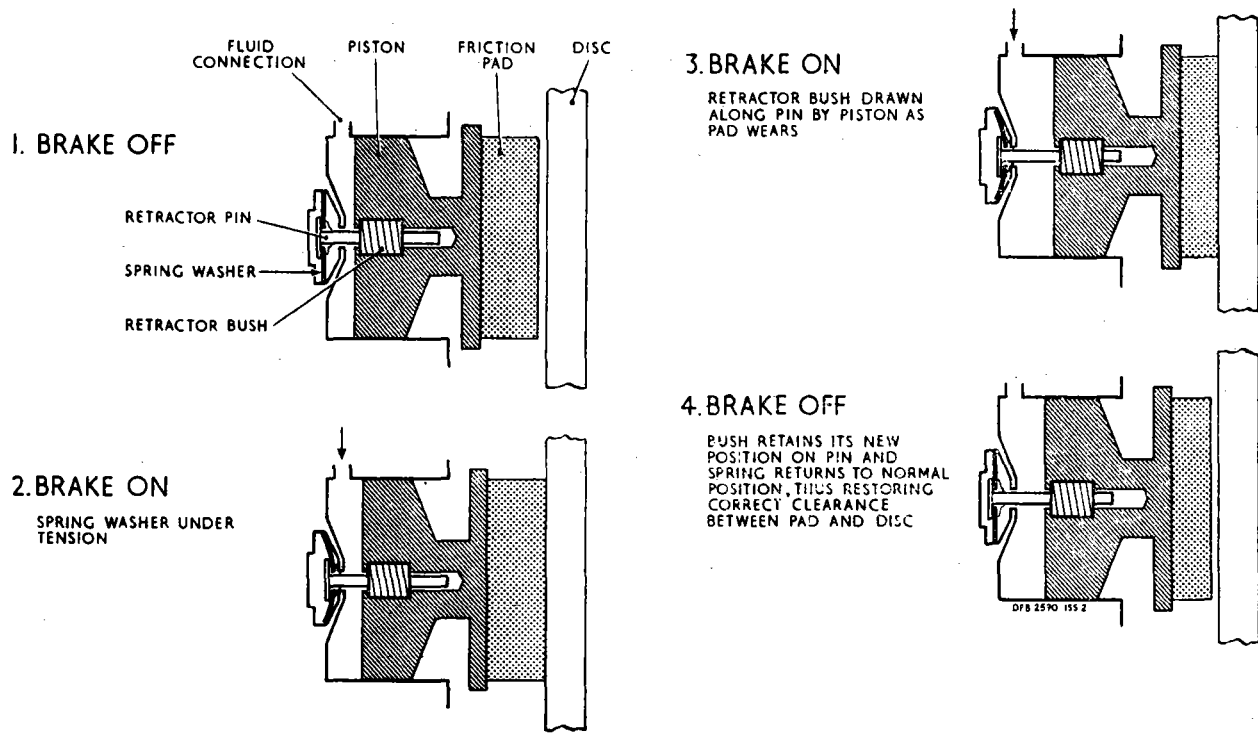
Operation of self-adjusting mechanism (Early Cars).
